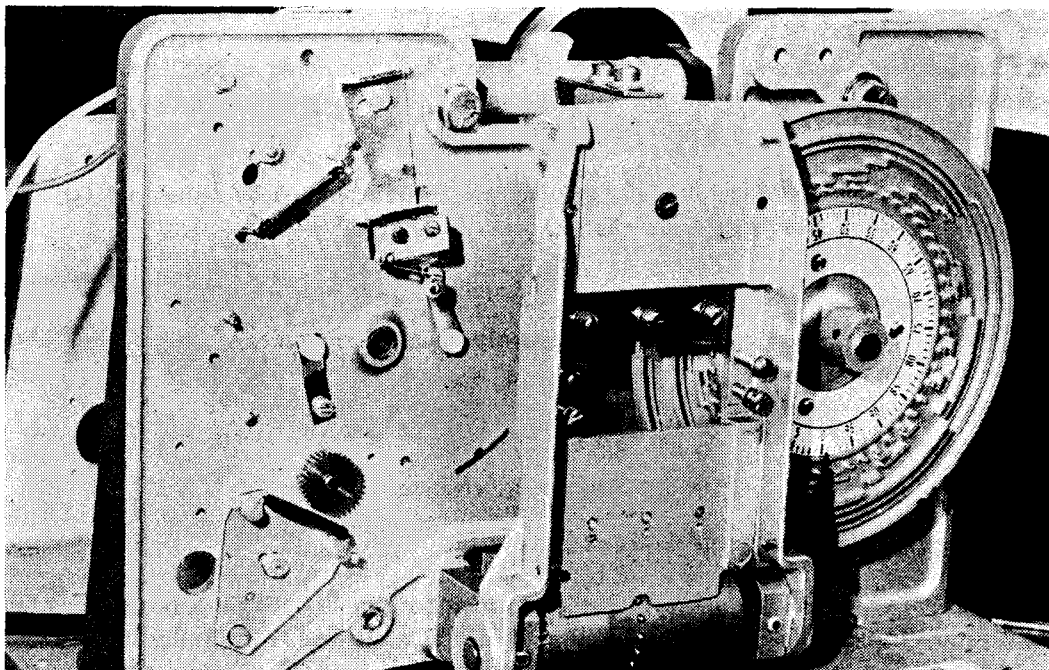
Front plate before wiring. Switches and pressure pads are visible
